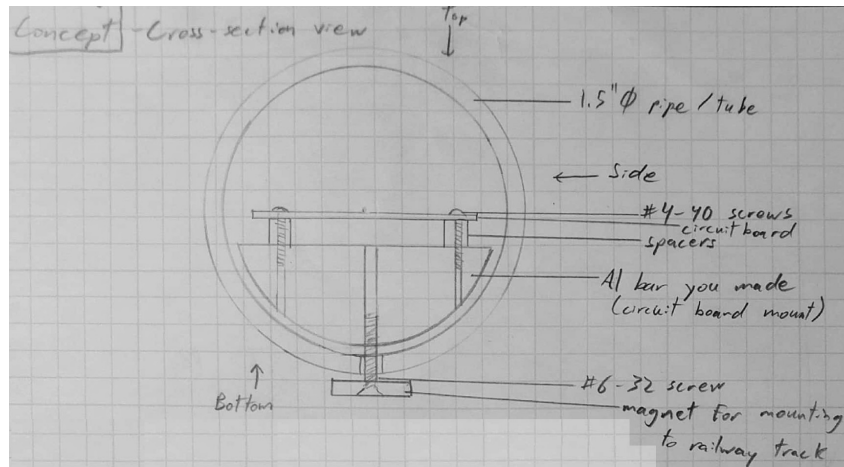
Cross-sectional concept drawing for the tube enclosure. Detailed drawings for each of the tubes and the aluminum circuit board mounts are not shown.
